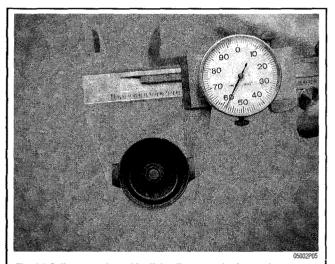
Calipers, such as this dial caliper, are the fast and easy way to make precise measurements
